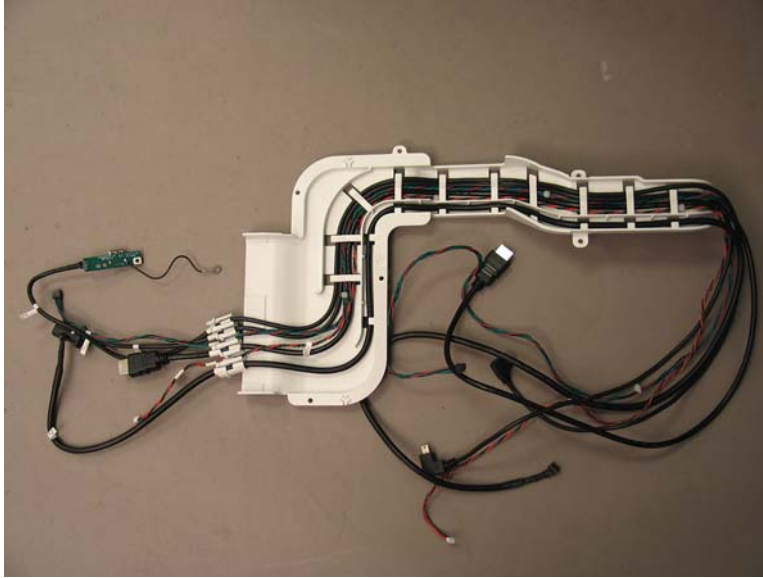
Remove the SCB shelf the cable guide cover (P774/P779)
